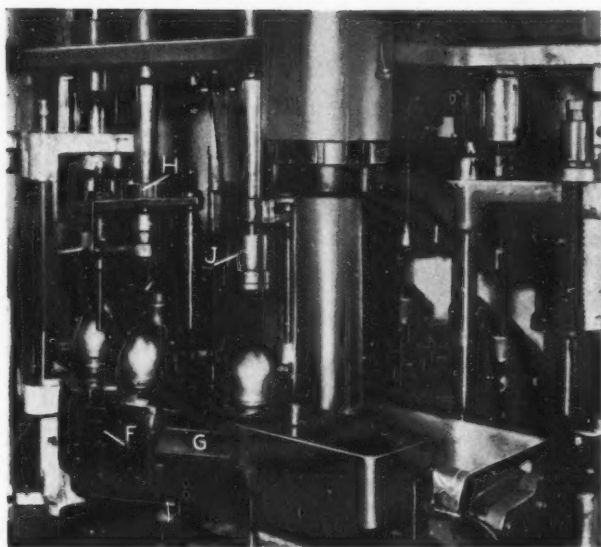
Close-up View of the Tooling for the Production of the Headlamp Pressing, Fig. 10, Showing the Rotary Forming and Trimming Tools at the Left
